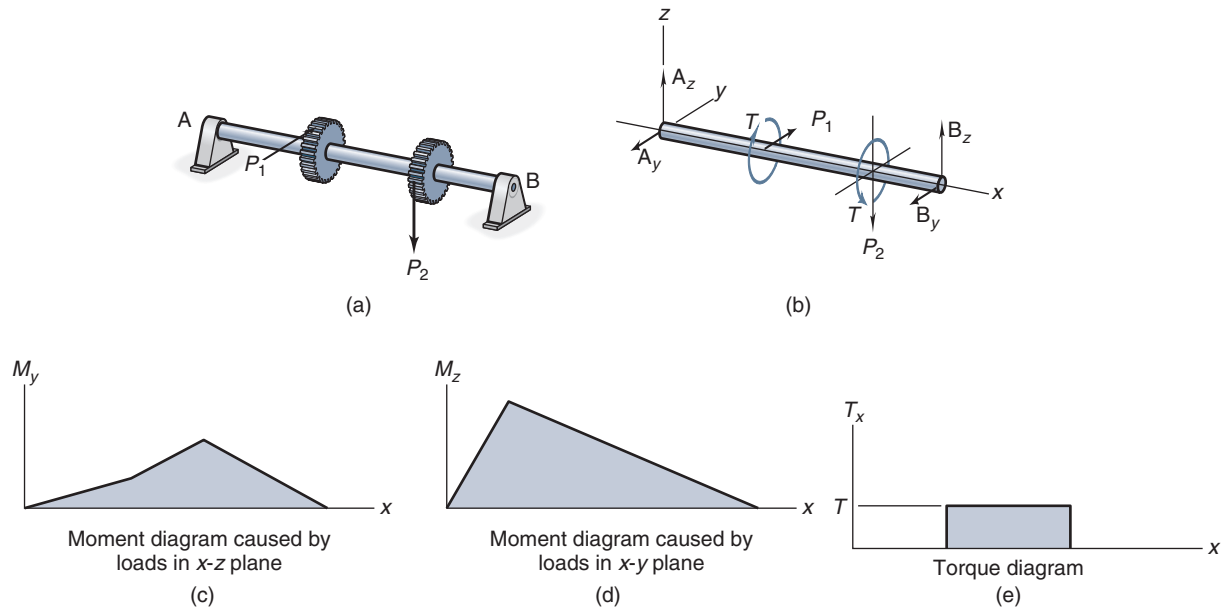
Shaft assembly. (a) Shaft with two bearings at A and B and two gears with resulting forces  $P_1$  and  $P_2$ ; (b) free-body diagram of torque and forces resulting from assembly drawing; (c) moment diagram in  $x-z$  plane; (d) moment diagram in  $x-y$  planes; (e) torque diagram.
